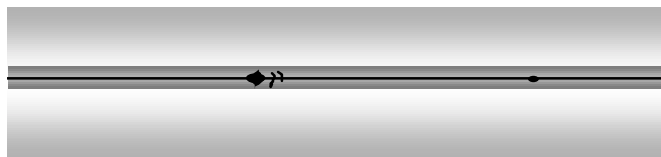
Molten metal not ejected from weld area during squeeze.
